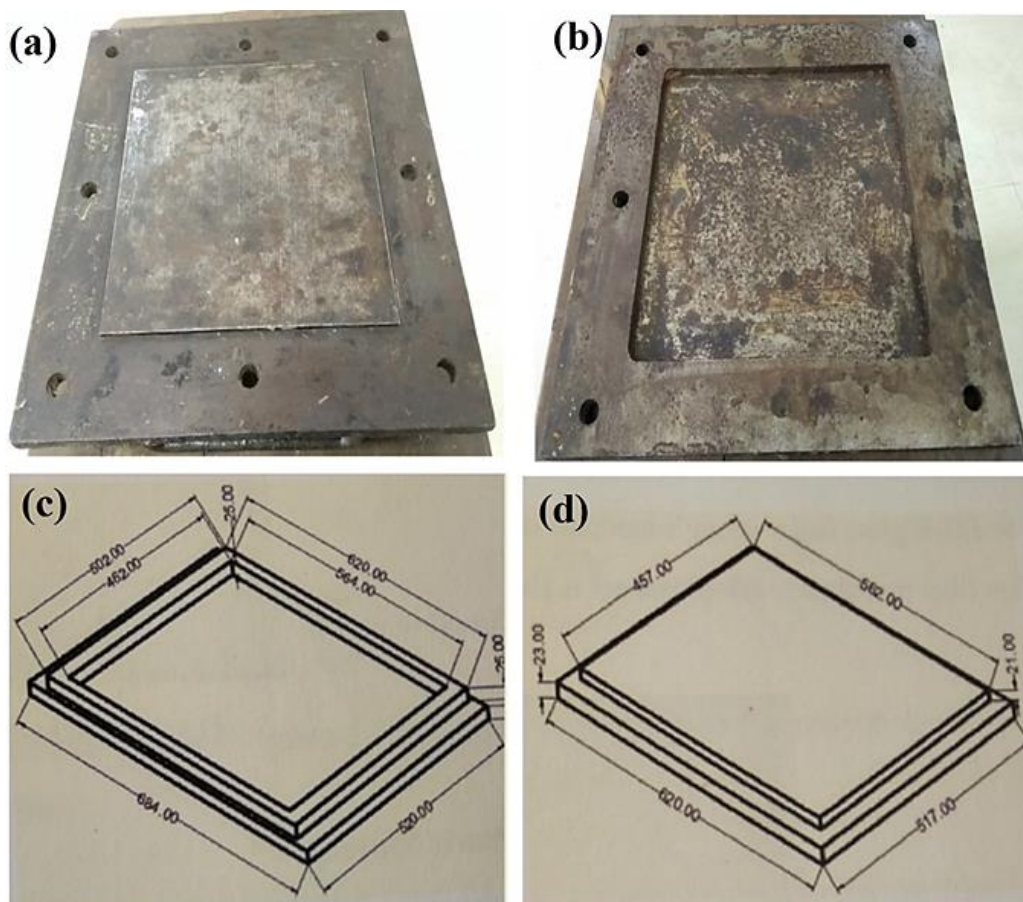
Mould for Hand Layup Process (a) actual isometric view of top plate (b) isometric view of bottom plate (c-d) dimension of the mould plates
